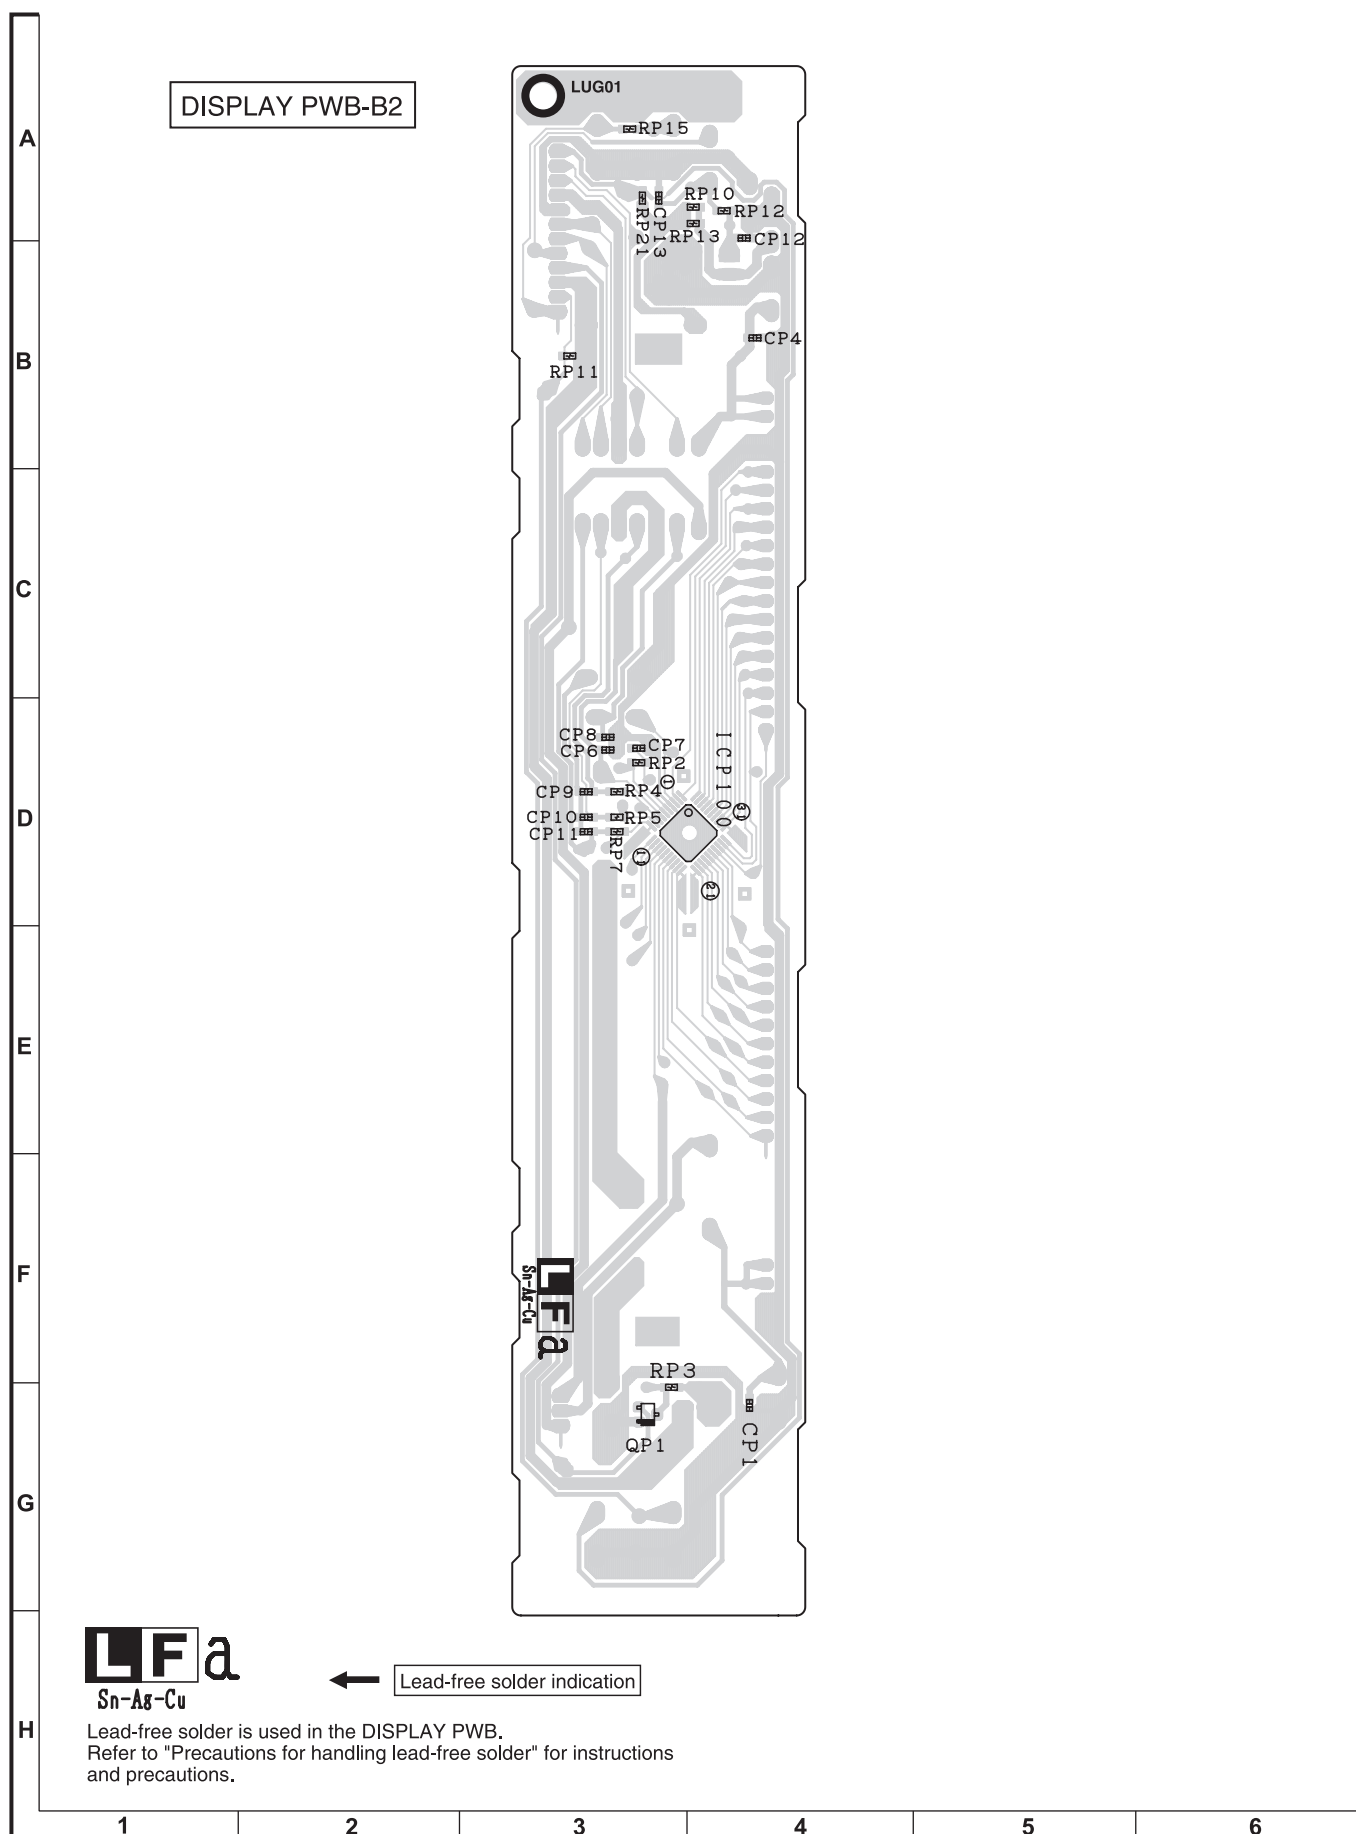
WIRING SIDE OF DISPLAY PWB (BOTTOM VIEW) (10/15)
